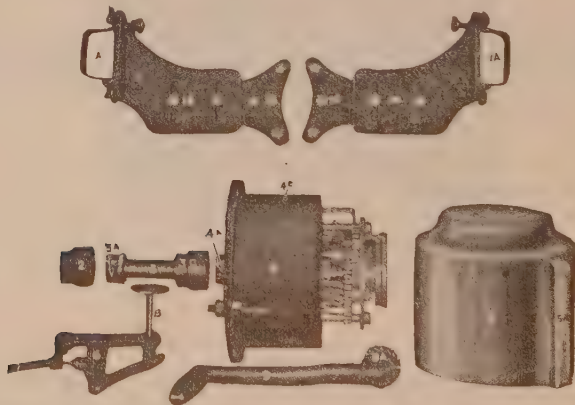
Volkman mechanical starter partially disassembled. 1, universal brackets; 1a, clamps; 1b, right and left side members; 1c, right and left center members; 2, crank shaft coupling; 3, extension shaft; 3a and 3b, extension shaft couplings; 4, spring case; 4a, center shaft coupling; 4b, holding clutch arm; 4c, oil hole; 5, brass cover; 5a, channel for brass sleeve and releasing cable; 6, trip pedal bracket; 7, brass sleeve for releasing cable; 8, trip pedal; 9, crank; 9a, detachable collar for hand rewinding; 10, post for releasing cable; 11 and 12, lock nuts; 13, swivel on release lever; 14, release lever; 15, flange on spring case; 16, releasing cable; 17, spring holding clutch; 18, hole in flange for brass sleeve.
